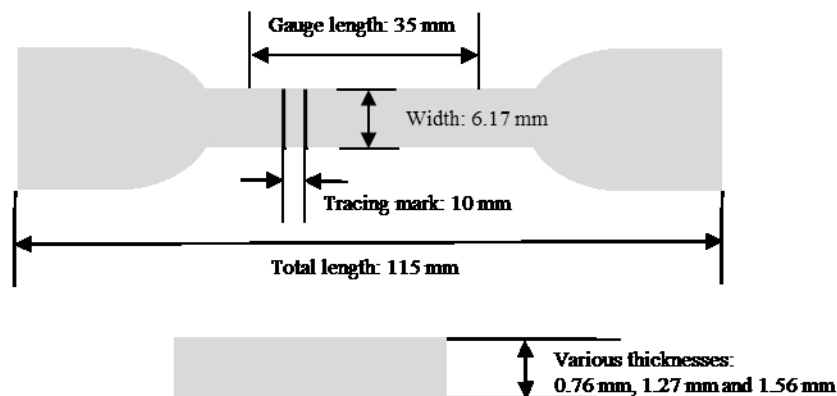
Configuration and dimensions of dumbbell PVB specimen.
